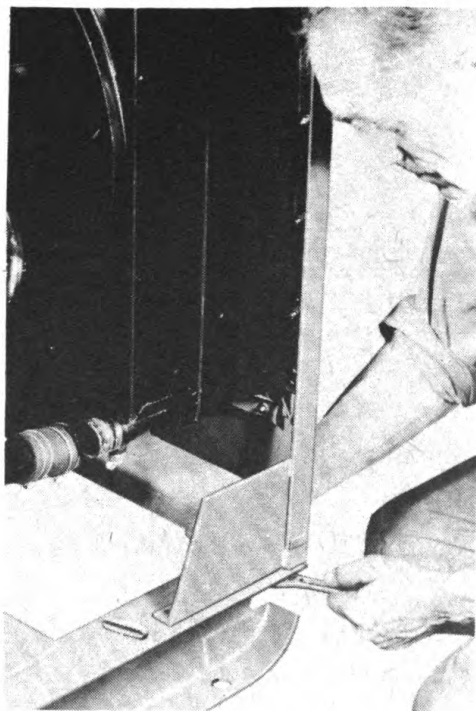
Removing Bolts Anchoring Radiator to Skid Base.
